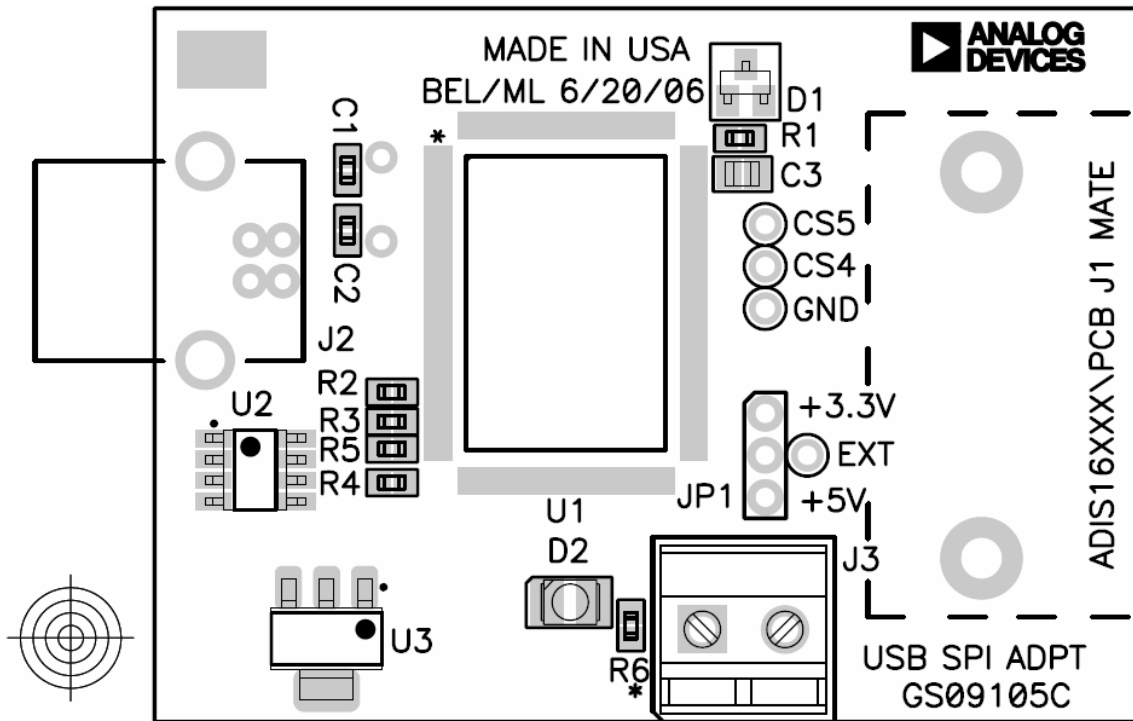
iSensor™ PC-USB Interface Board Layout (Top View)
